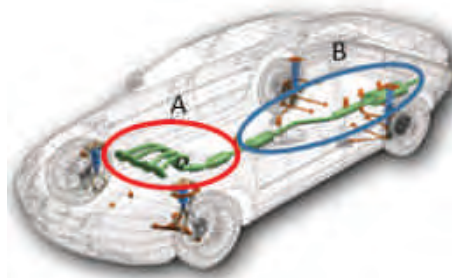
Location of the exhaust system elements in a passenger car; A – “hot end”, B – “cold end” [4]
